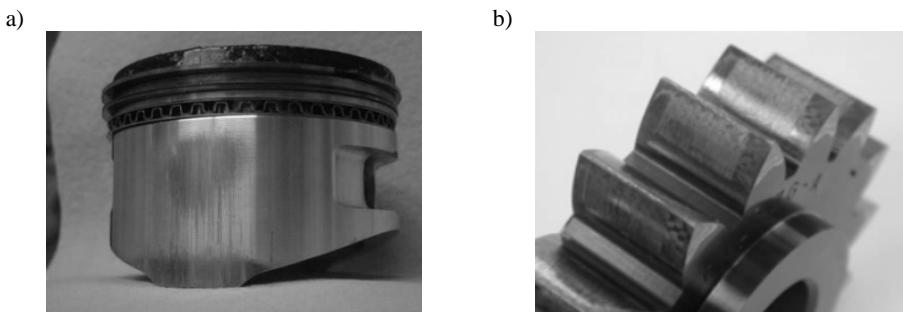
Images of the scuffing wear on the surface of [L. 11, 13]: a) a piston, b) a gear teeth
